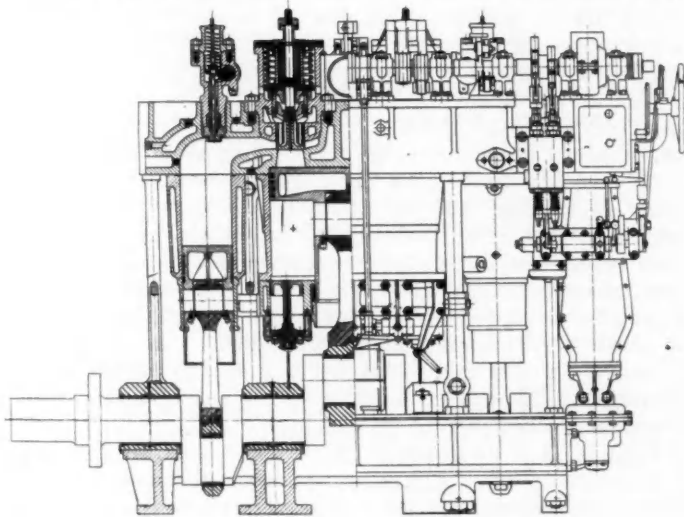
WORKING DRAWING PARTLY IN SECTION OF THE COMPOUND ENGINE SHOWN IN FIG. 26
